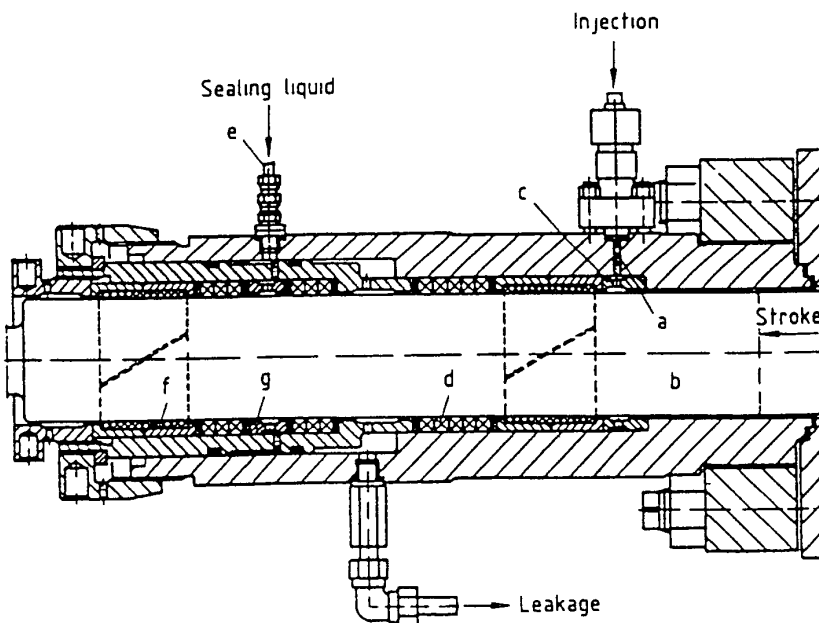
Piston seal with packing rings, lubrication, and injection flushing (URACA) a) Injection b) Piston c) Injection bushing d) High pressure seal e) Flushing lubricating f) Guide bushings g) Low pressure seal
